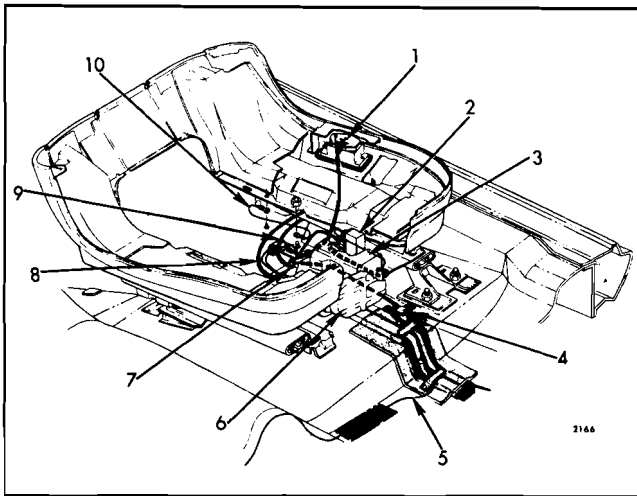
Four-Way "Strato" Bucket Seat Wiring - All Styles
